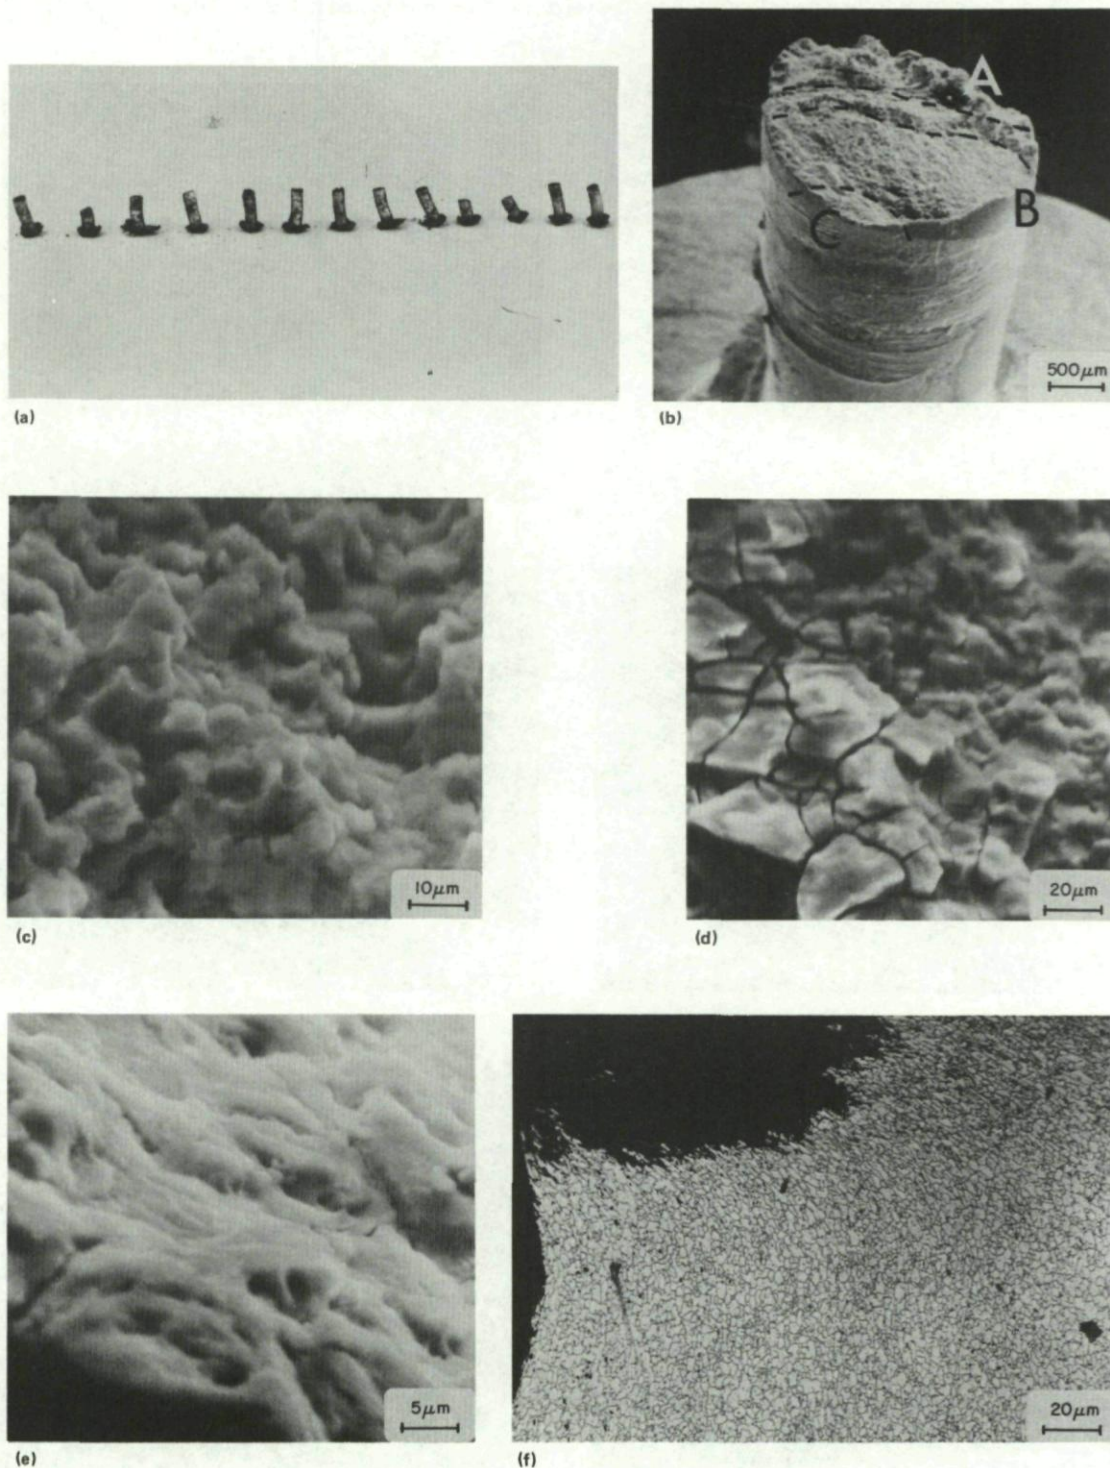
Corrosion fatigue of 5052 aluminium alloy rivets
